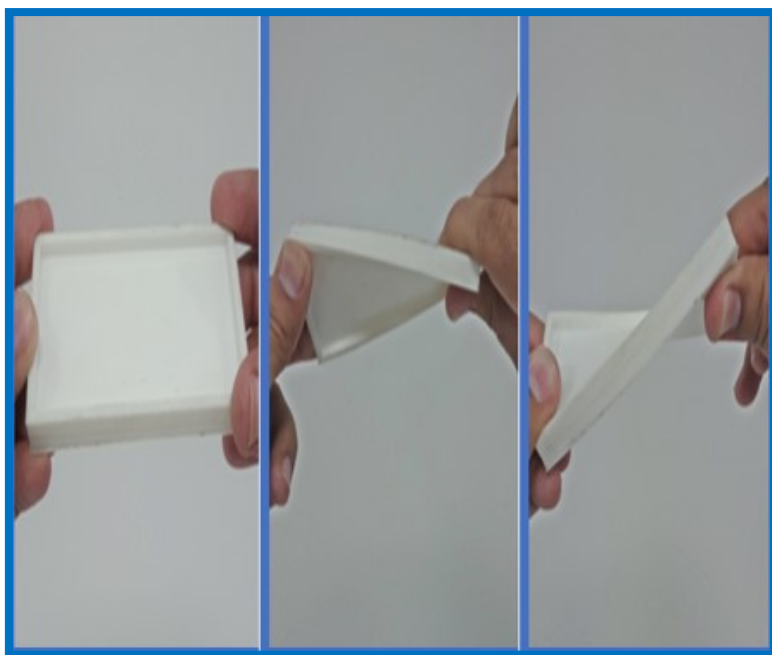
Real-time images showing the flexibility of 3D printed casing for molding and casting of Ecoflex/MoS₂ composite film.
